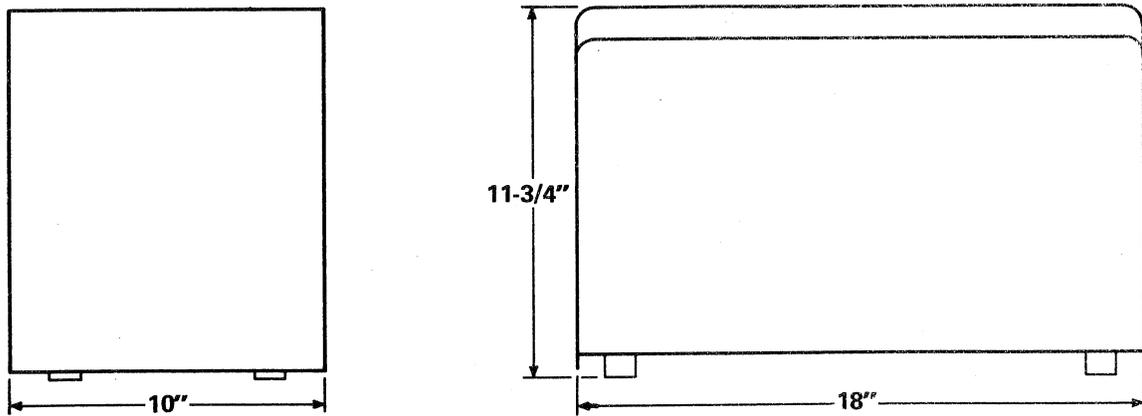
DIMENSIONS, MODEL 440 KEYBOARD
